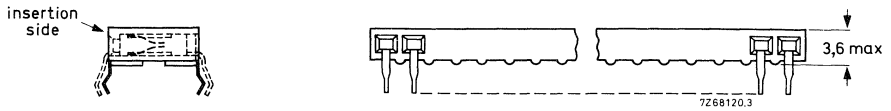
Board edge socket, single row. Dimensions are identical with those in Fig. 3, except as shown.
